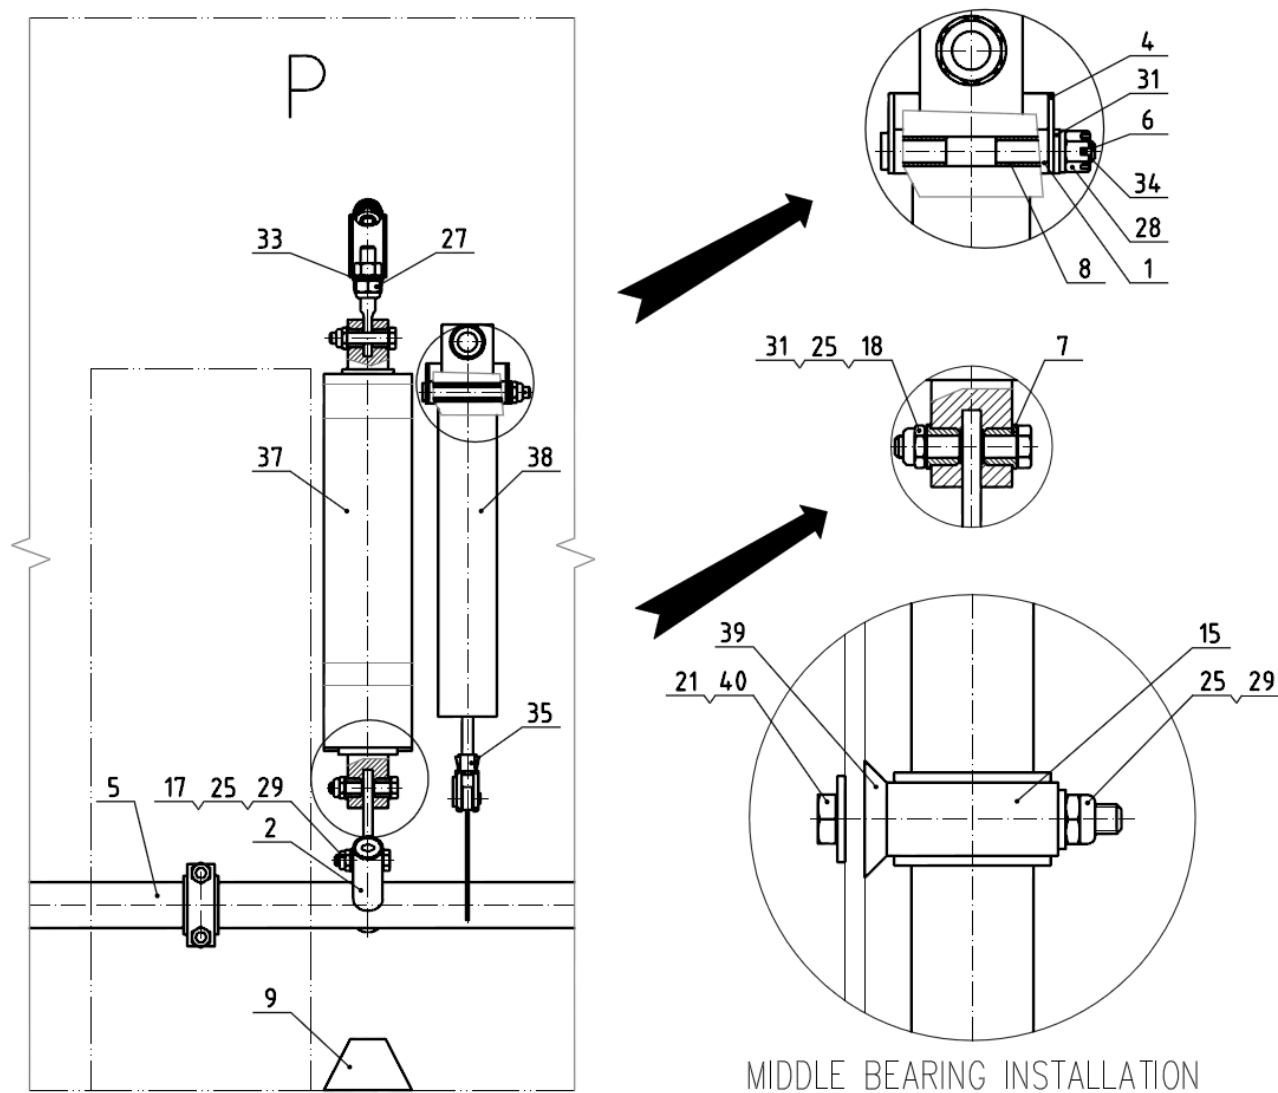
Electrical Flap Control System Removal / Installation (page 2 of 3)
